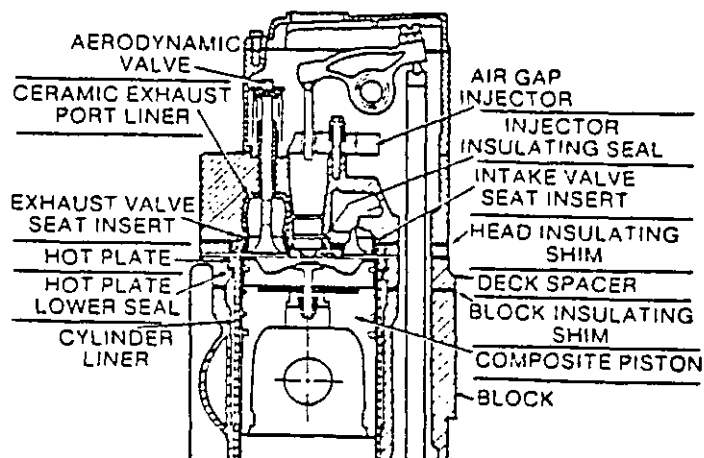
Cross Section of the Cummins Insulated Diesel Engine.
